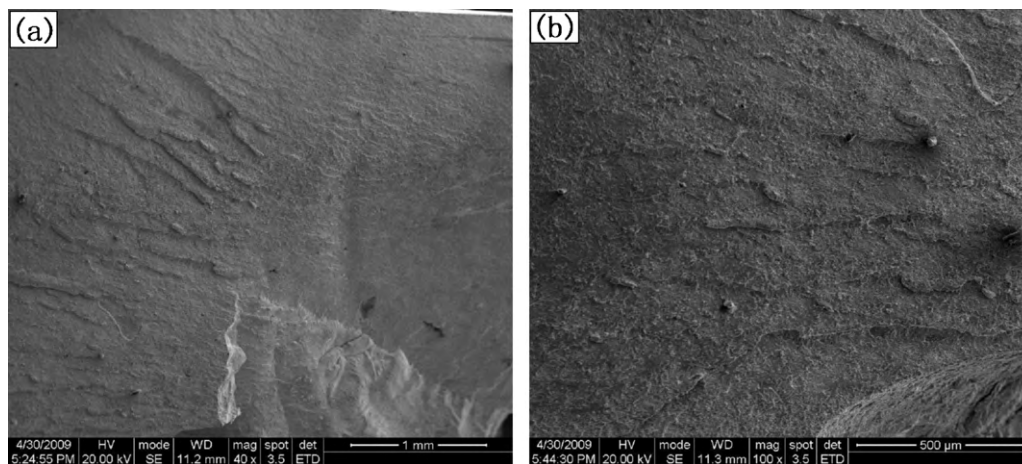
The fracture surfaces of the sample experienced CT for 24 h.
